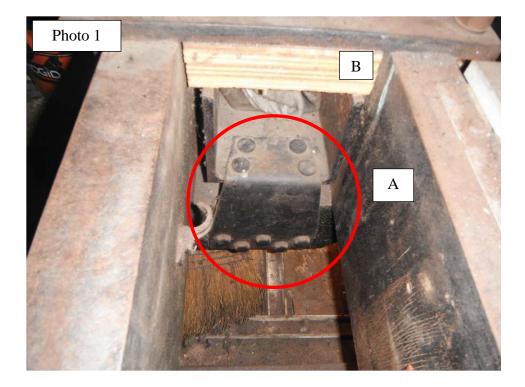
Showing intact spring hitch [A] and wood blocking [B
